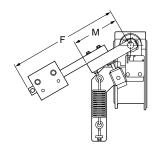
Valve Dimensions (Inches) Sizes 12-48 inch
